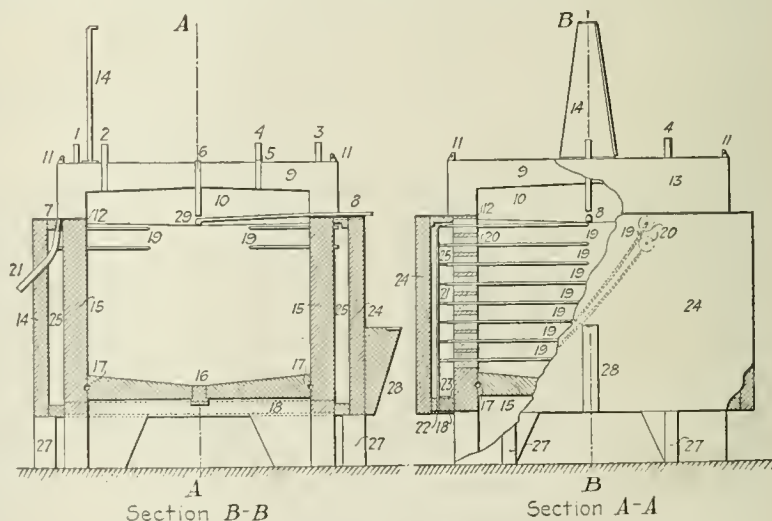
DETAILS OF HEATING ELEMENT, VAT, AND JACKET
